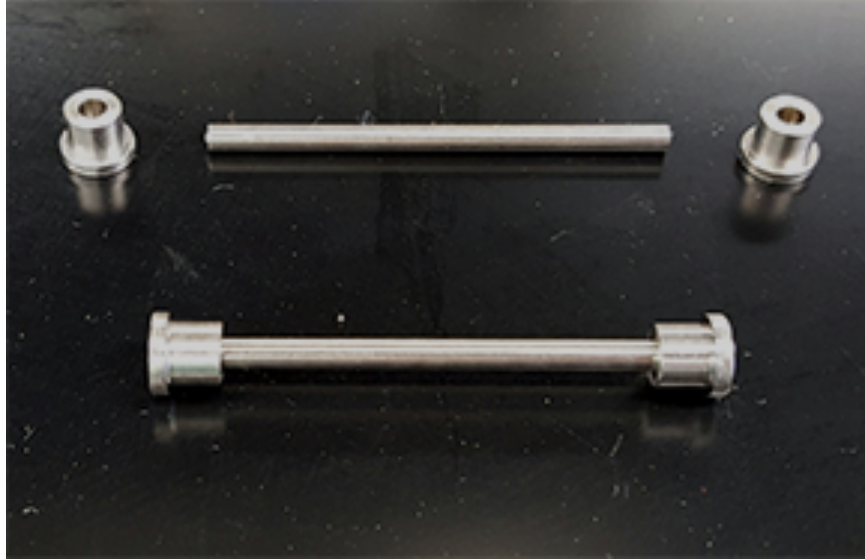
The stainless steel mold engineered with interlocking socket ends to mold the lumen of the cylindrical cytotubes. The design allows for the removal of the stainless steel mold while maintaining the collagen construct after it has polymerized.
